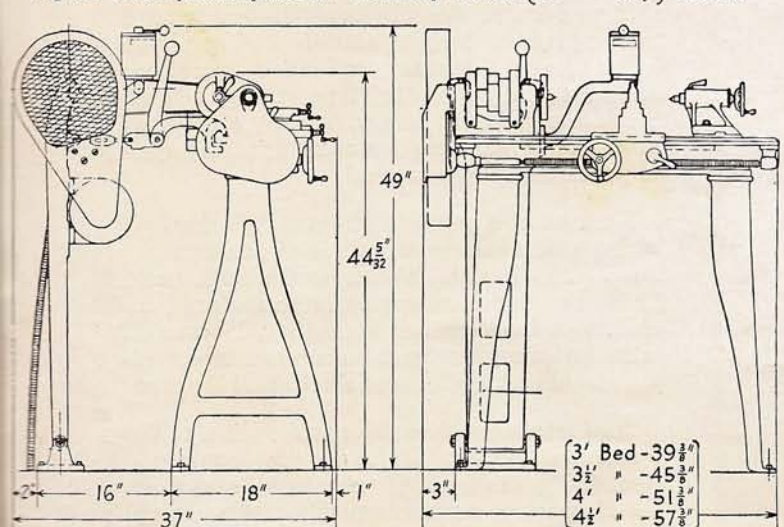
Floor Space Required for 9-inch "Workshop" Floor Leg Lathes.
